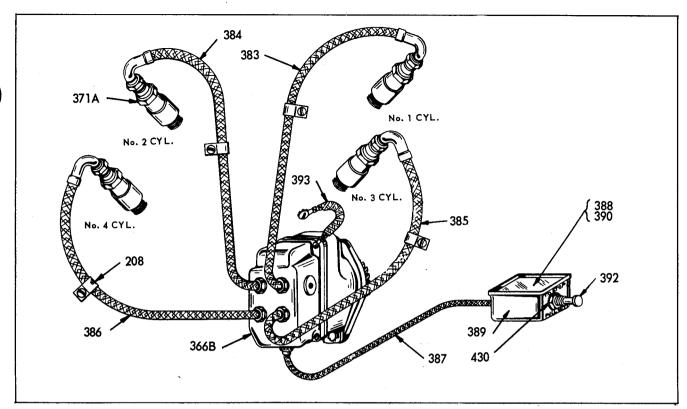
B, RADIO SHIELDED MAGNETO IGNITION FOR MIL-E-11275-A ENGINES
